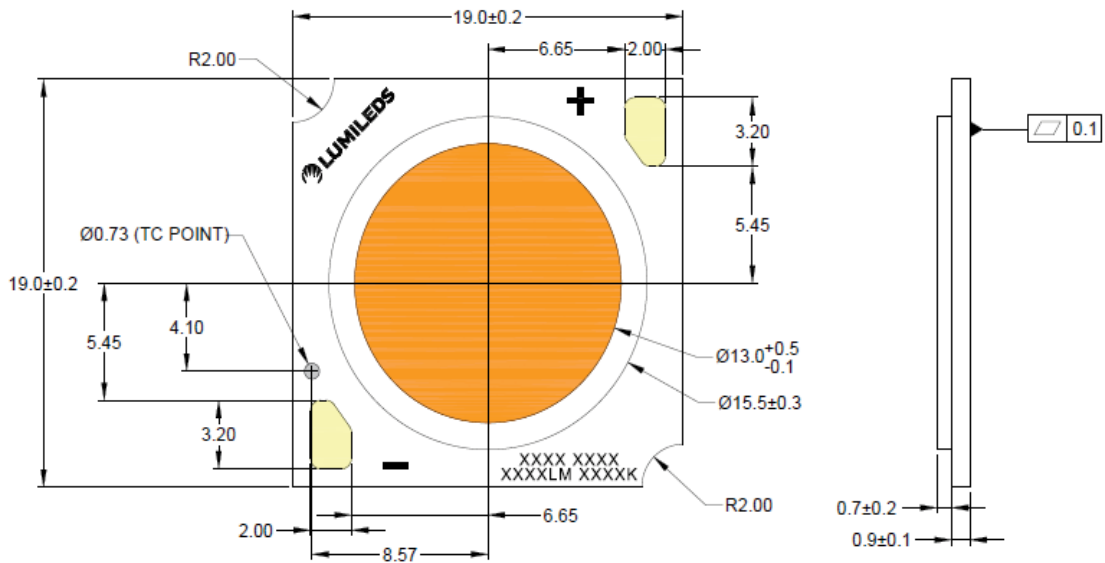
Mechanical dimensions for L2C6-xxxxxL05x1300 and L2C6-xxxxxL06x1300.
